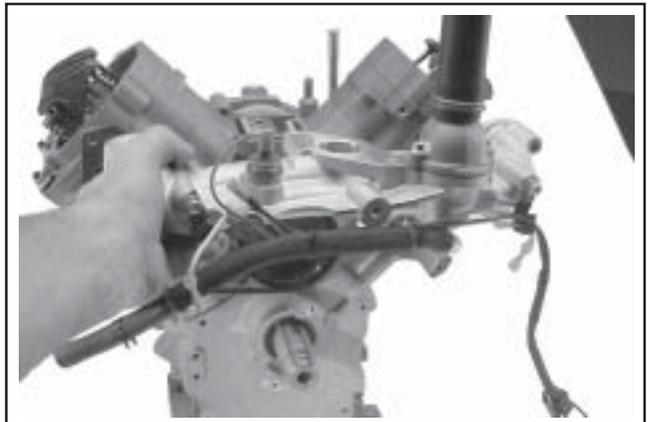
Removing the Intake Manifold Assembly from the Engine.
